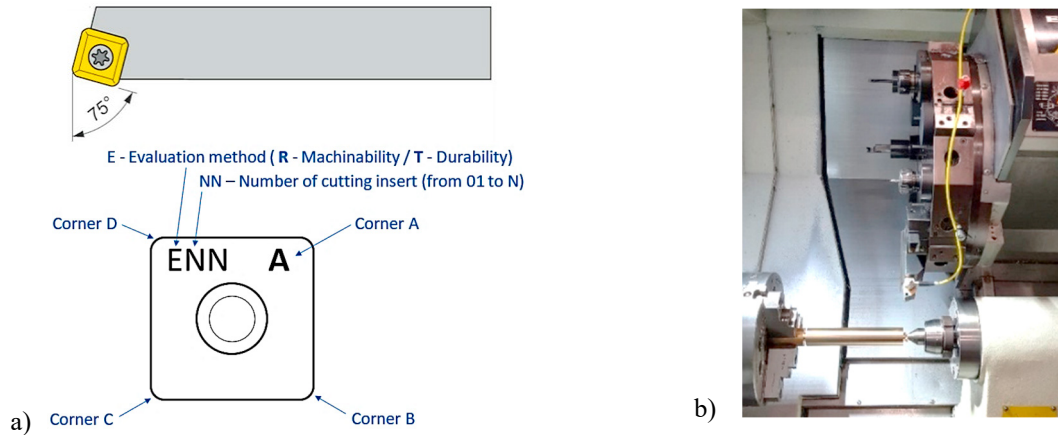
(a) Cutting tool with a cutting insert; (b) Machining set.
